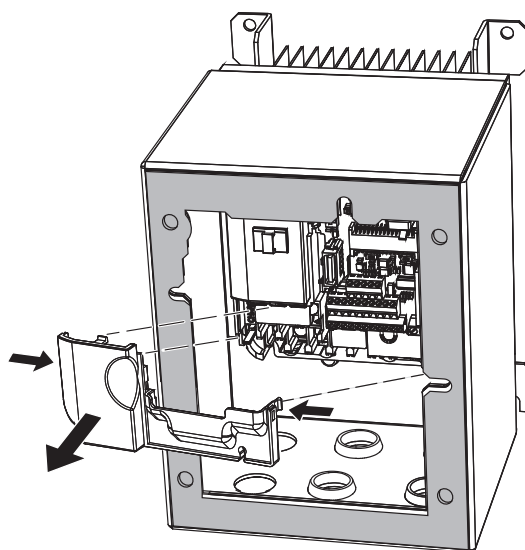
Remove IP66/UL Type 4X Lower Terminal Cover
